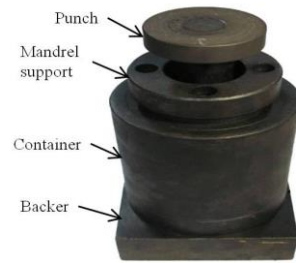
Shape of welding concurrent extrusion forming die and container for experiments
